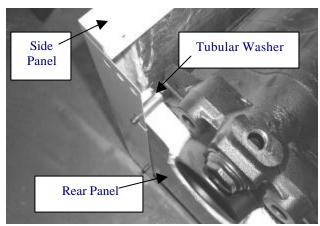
Steps 1,2 +3 in Assembling the Boiler Jacket
